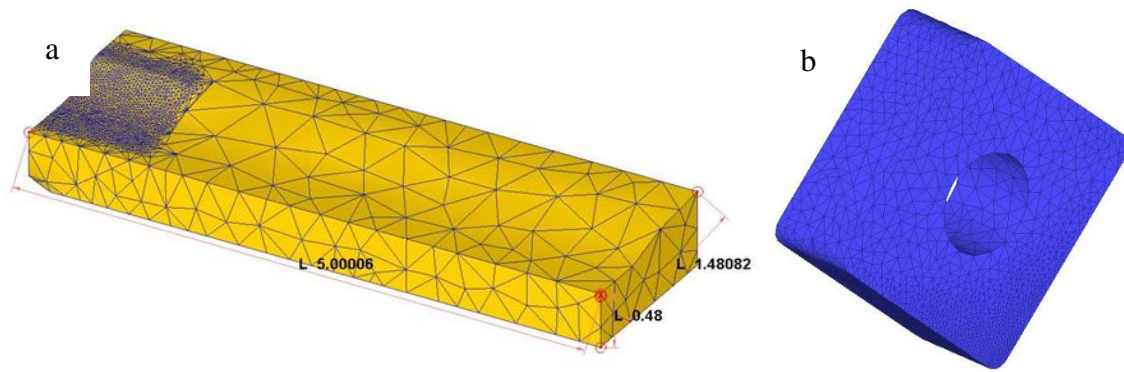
(a) Meshed Workpiece with dimension (b) Meshed cutting tool
